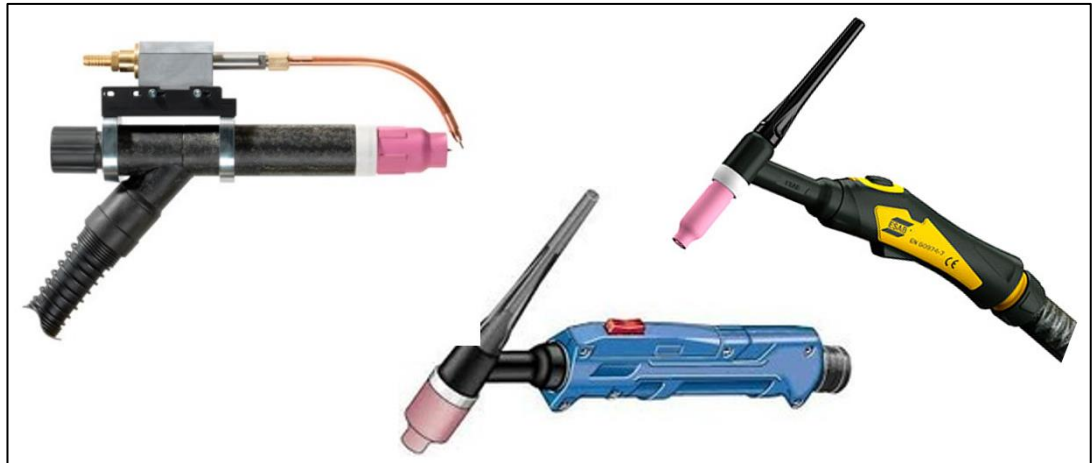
The most common types of torch used in TIG welding.
